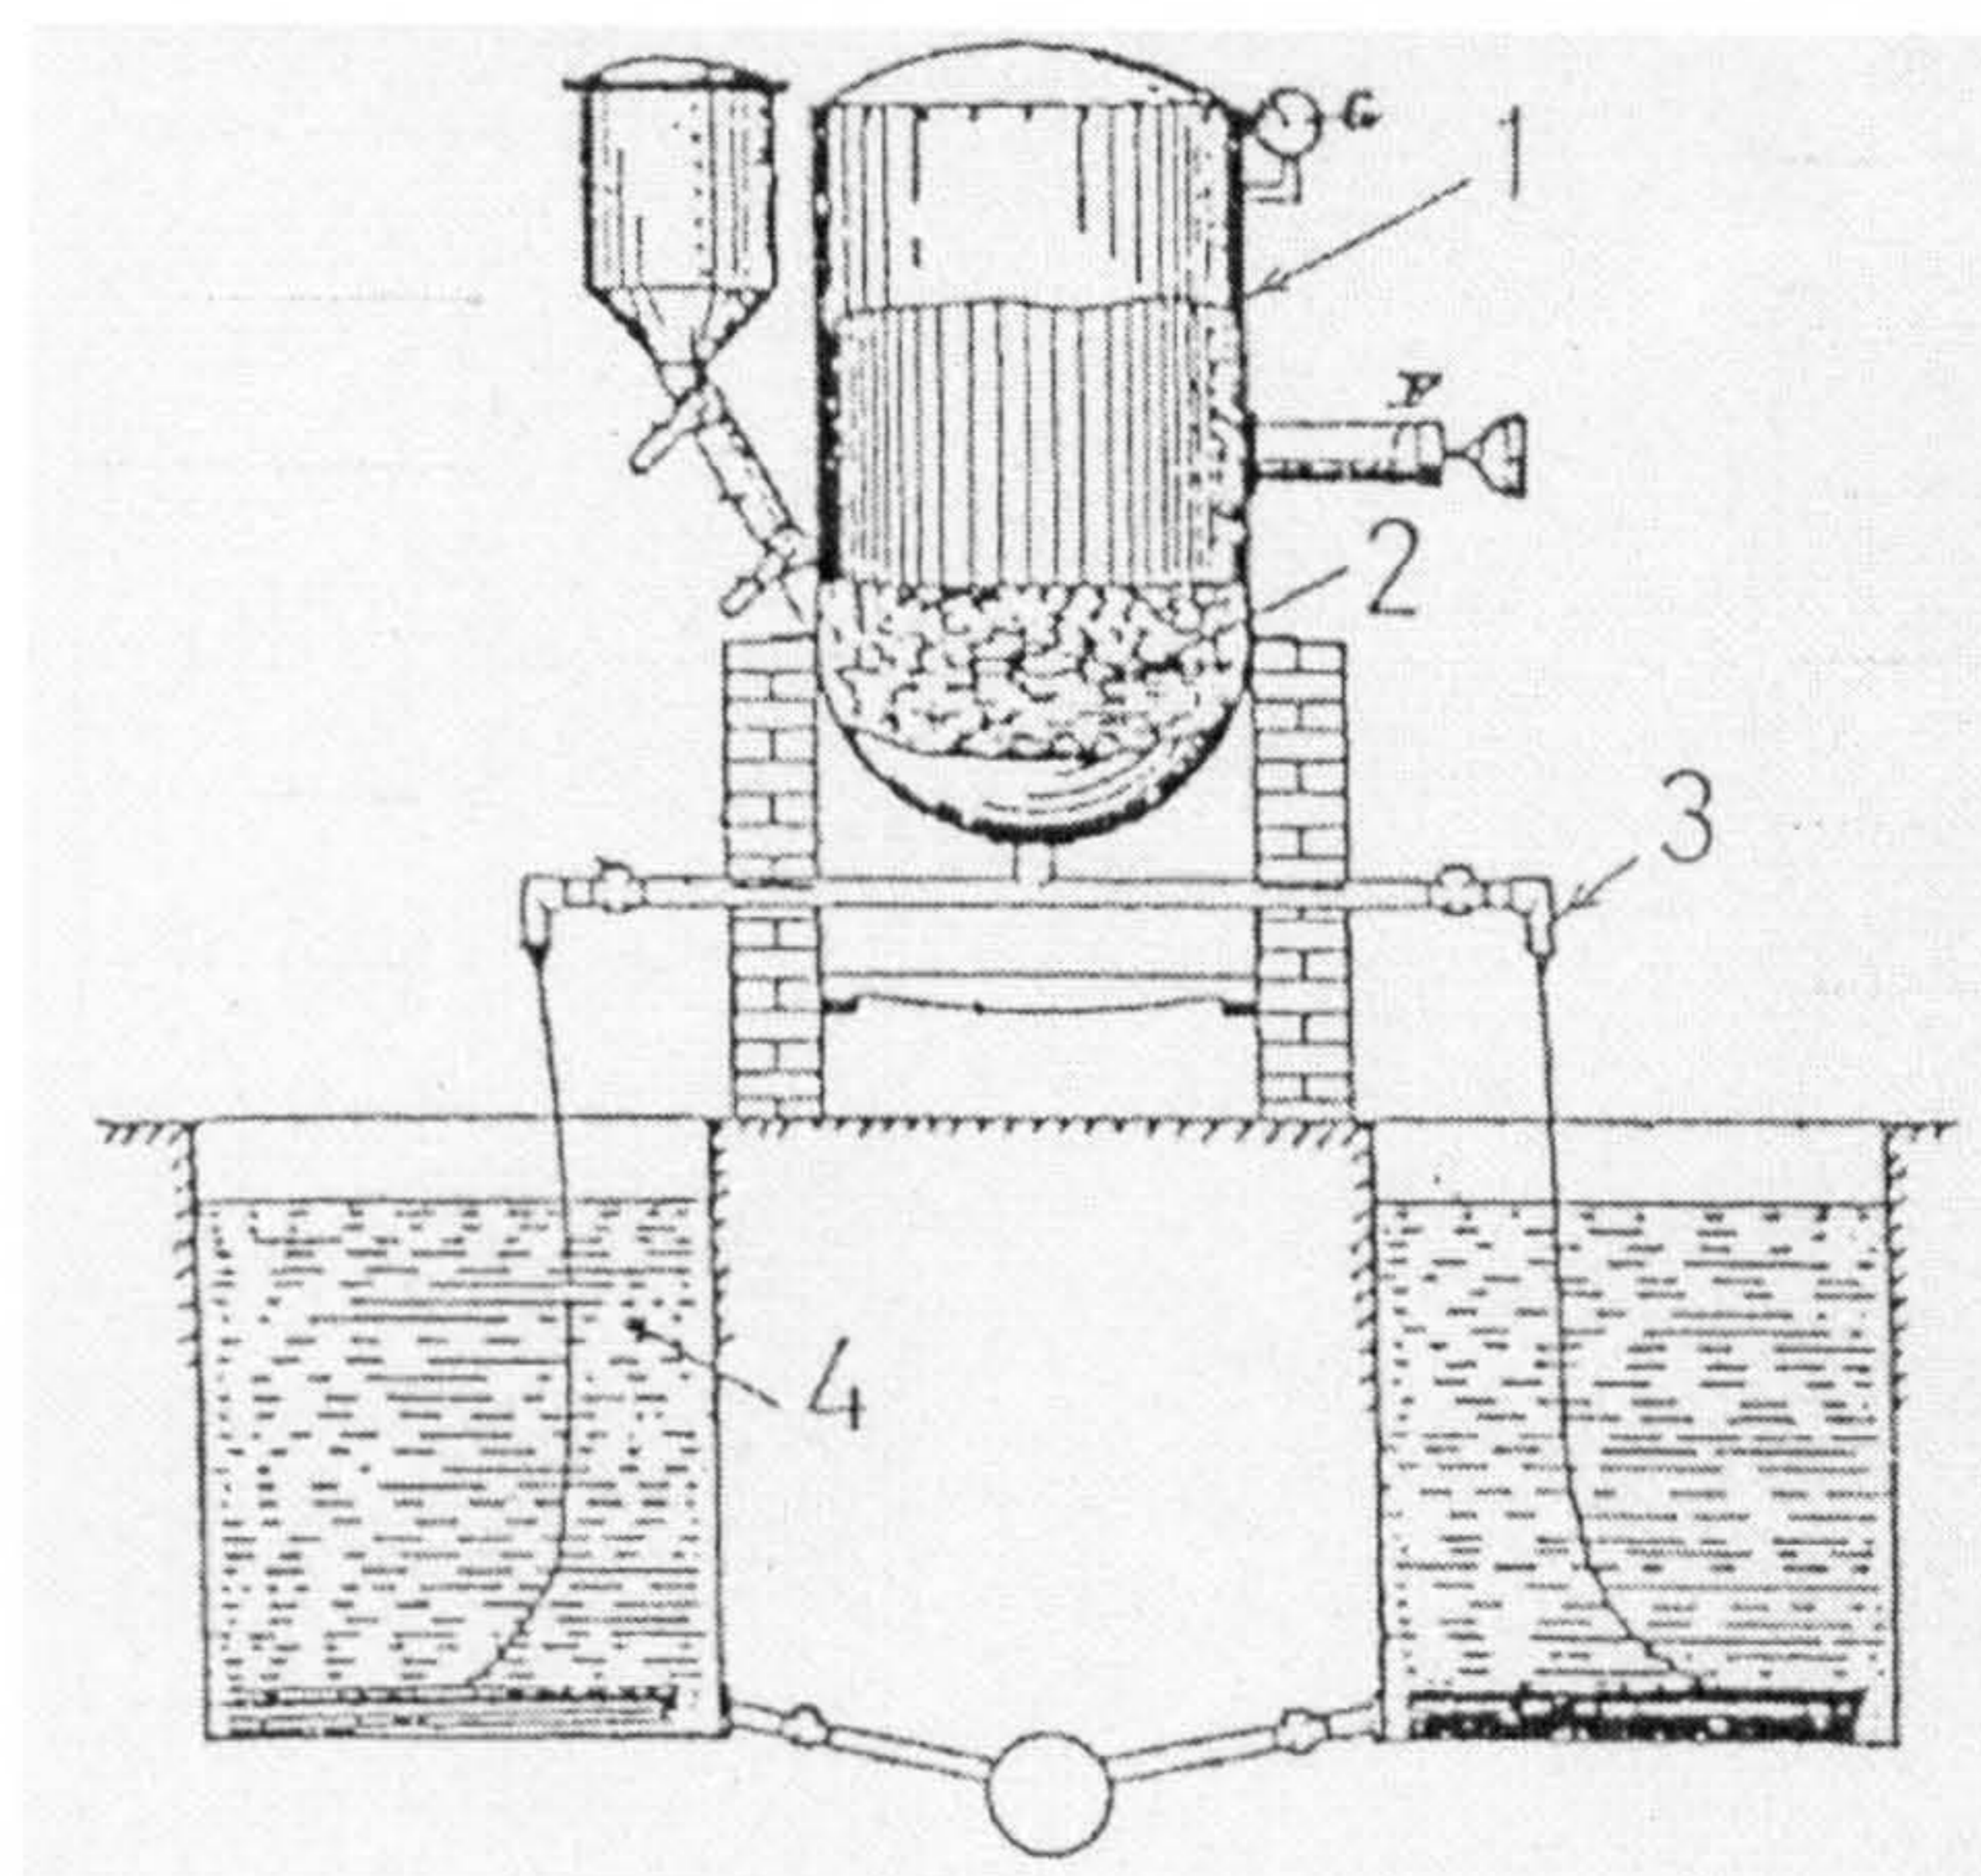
Schematic illustration of Small's method of wire casting, (1) solder tank, (2) molten solder, (3) nozzle, and (4) water tank [46].
